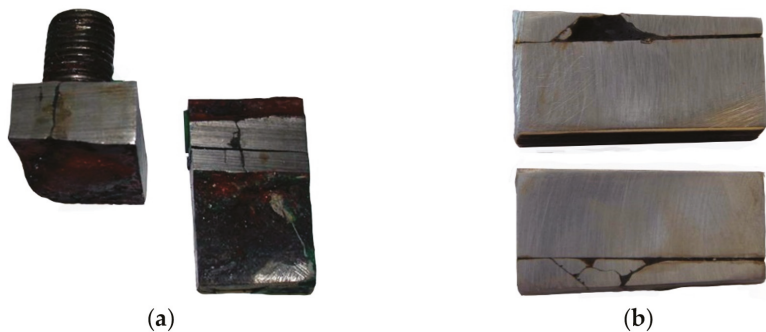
Macroscopic examination (handy-size bulk carrier 30210 DWT): (a) crack I and the cutting plane 2-2 and (b) the branching end of crack I.
